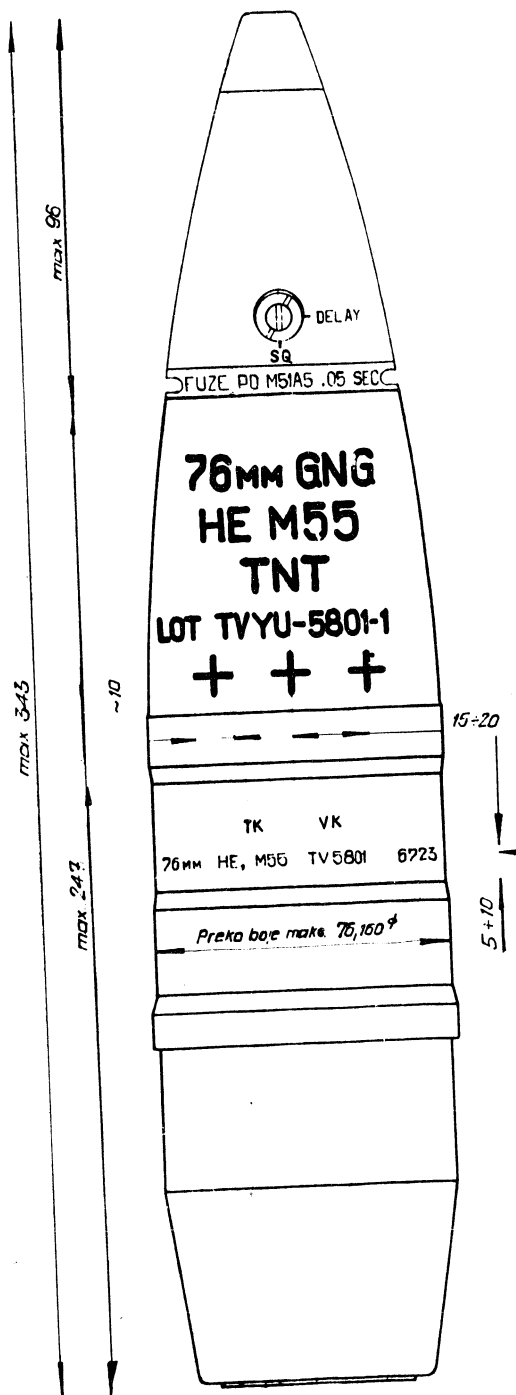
HIGH EXPLOSIVE SHELL »HE M 55«
